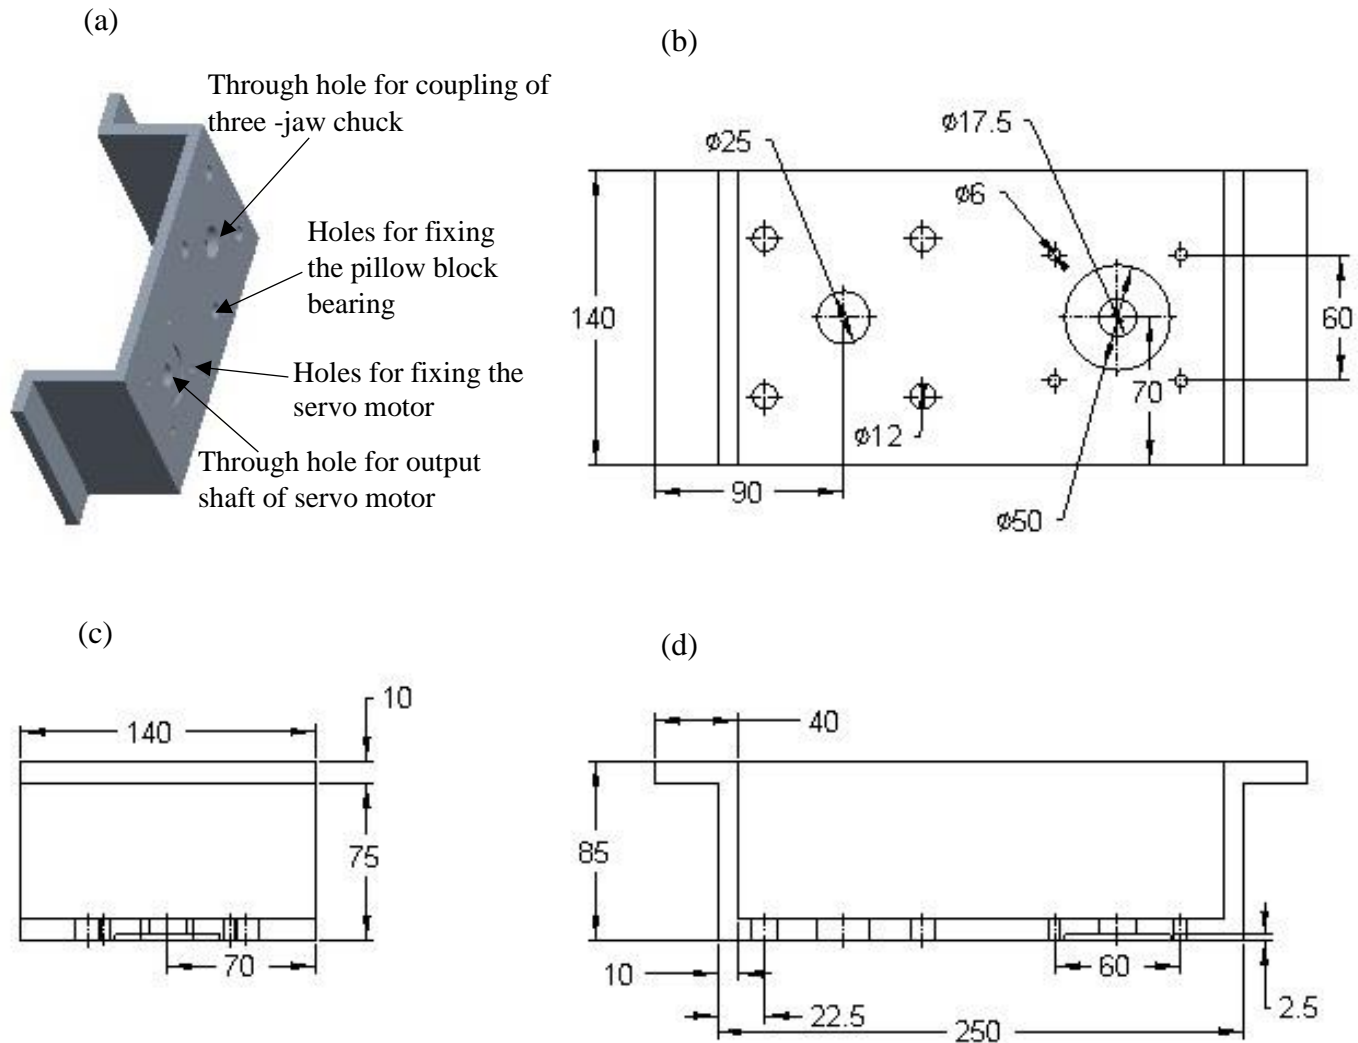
(a) Three-dimensional view (b) front view (c) side view, and (d) top view of the computer aided design model of the fixture/structure.
